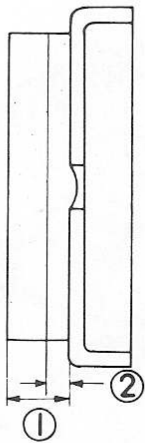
When checking the brake pads, do not include the metal backing plate in the measurement (Sec 22)
